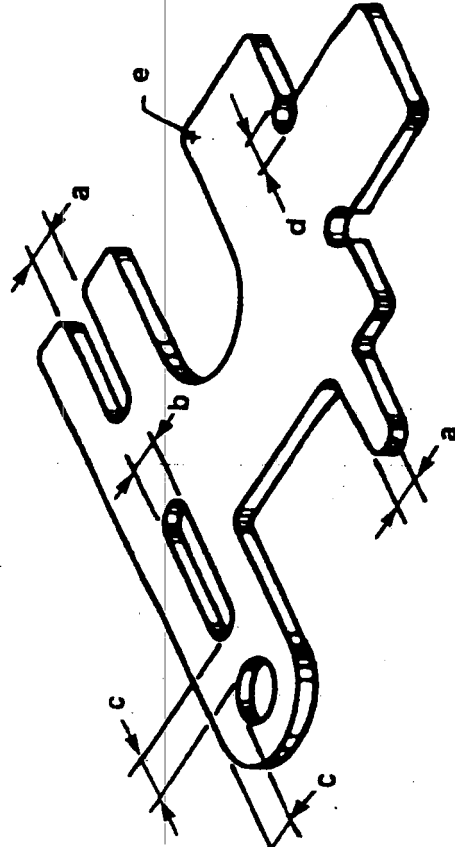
Critical dimensions in the design of a sheet metal blank.
